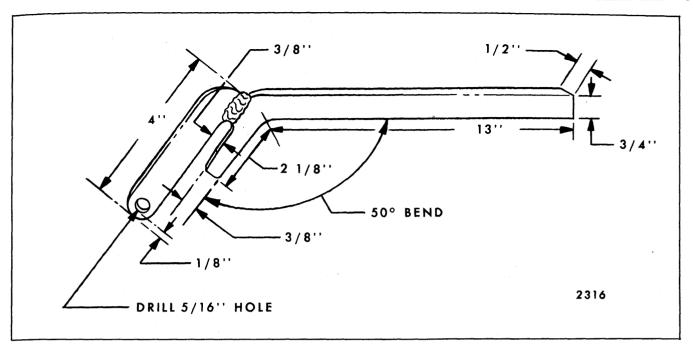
Tool J-22291 "E" Body Torque Rod Adjusting Tool
